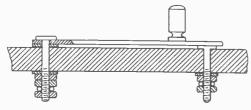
CROSS SECTION THROUGH SWITCH AND BOARD
